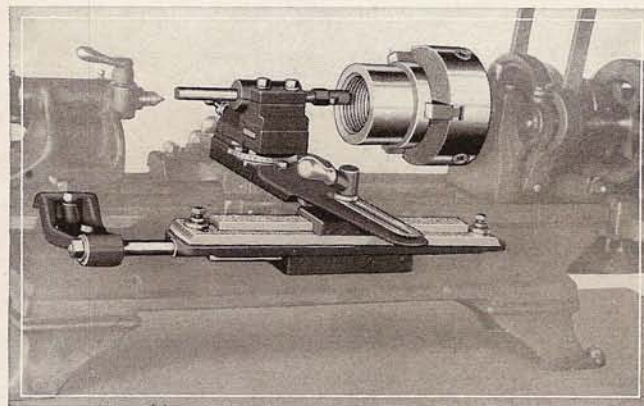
Cutting an Internal Taper Thread on a No. 22—9-inch Junior Lathe Equipped with Taper Attachment
